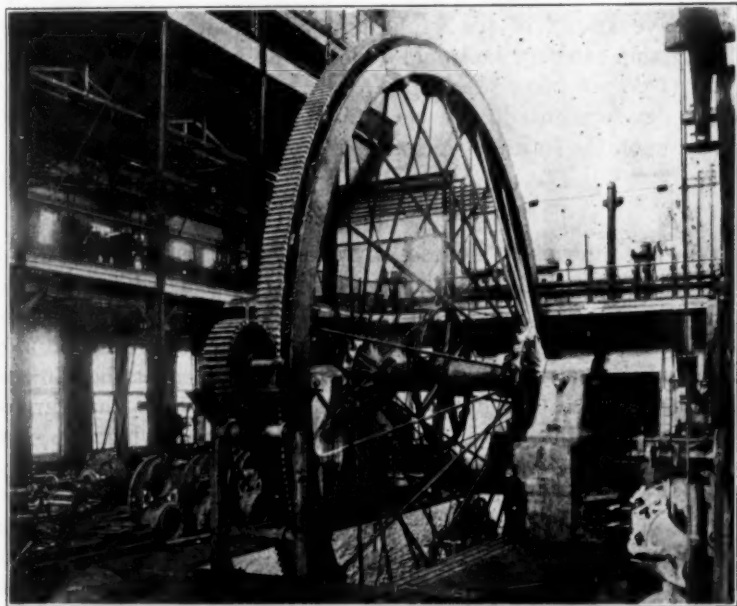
"50-FT." SAND WHEEL WITHOUT BUCKETS. CUT GEARS
